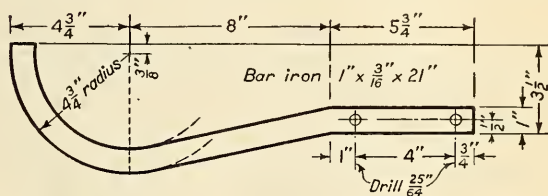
Upper special stripper, Case-Osborne corn binder
